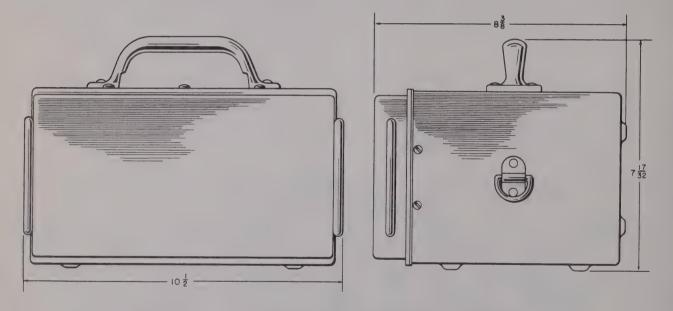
Power Supply PP-530A/URM-17, Outline Drawing
